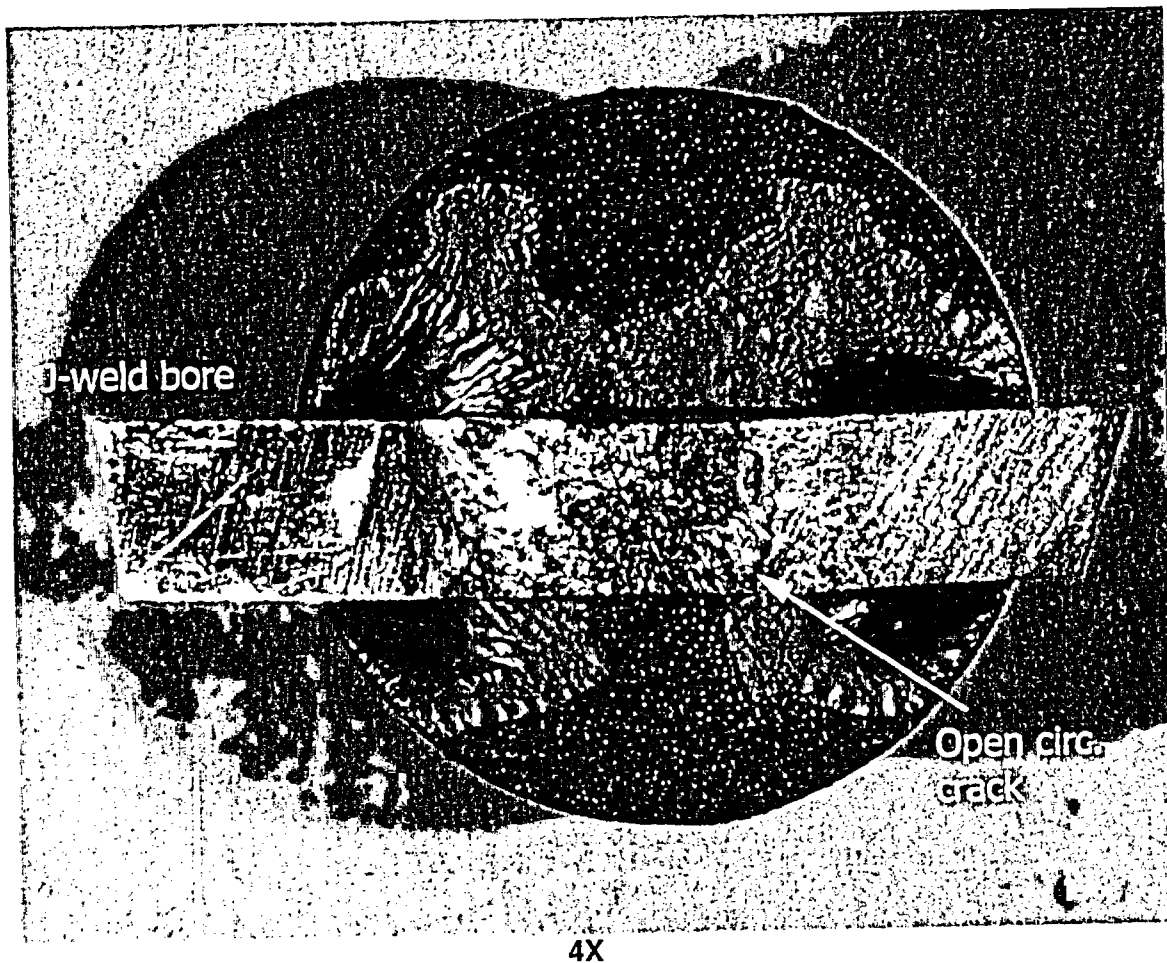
Macro photograph of the opened-up circumferential cracking in the J-groove weld at  $\sim 30^\circ$ . The underside surface of the J-groove weld (in contact with RCS) is shown. Refer to Figures 5.6 and 5.8 for the sample location. The rectangular sample (A2A6A2C2) is secured to the round SEM stub with black carbon tape.
